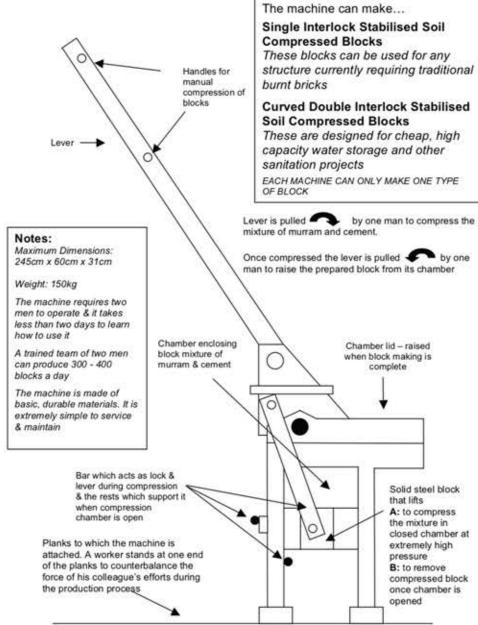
Drawing of the CEB machine used by C-re-aid NGO.
